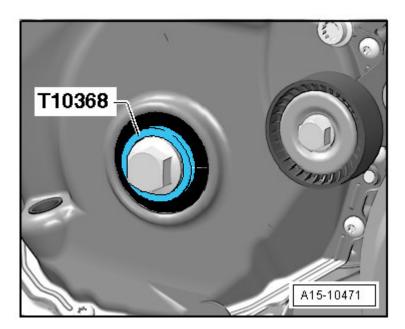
Identifying Vibration Damper Bolt And Thrust Piece T10368
